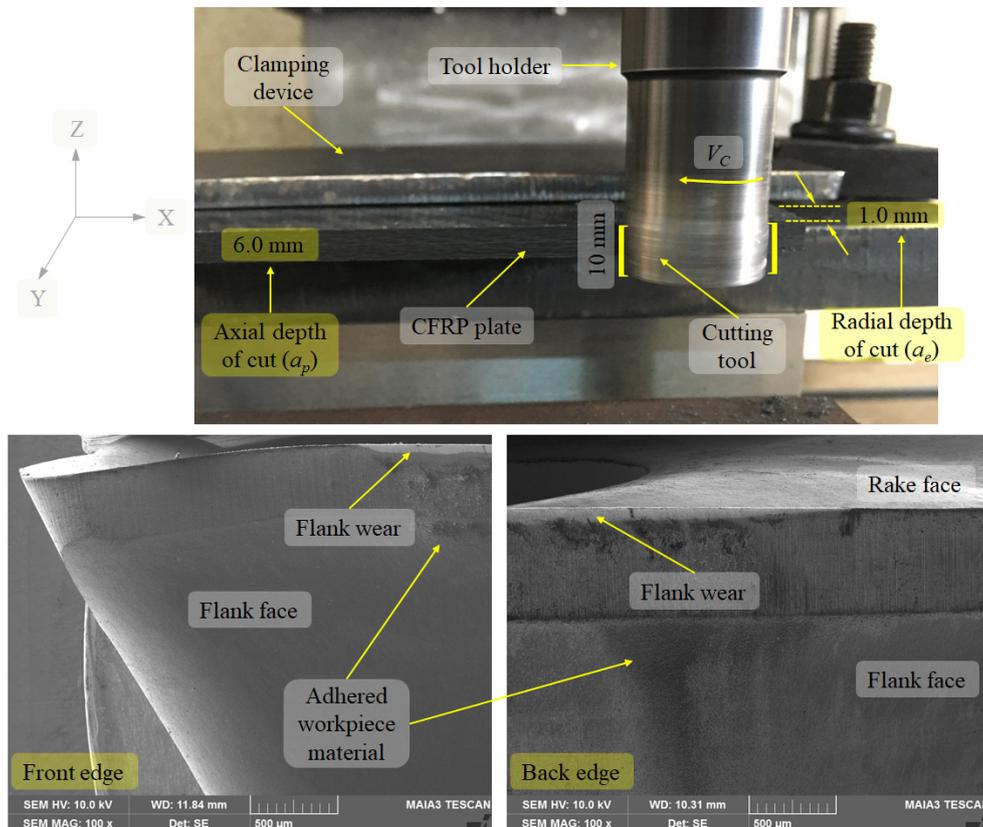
Milling conditions and SEM image of cutting tool front and back edge.
